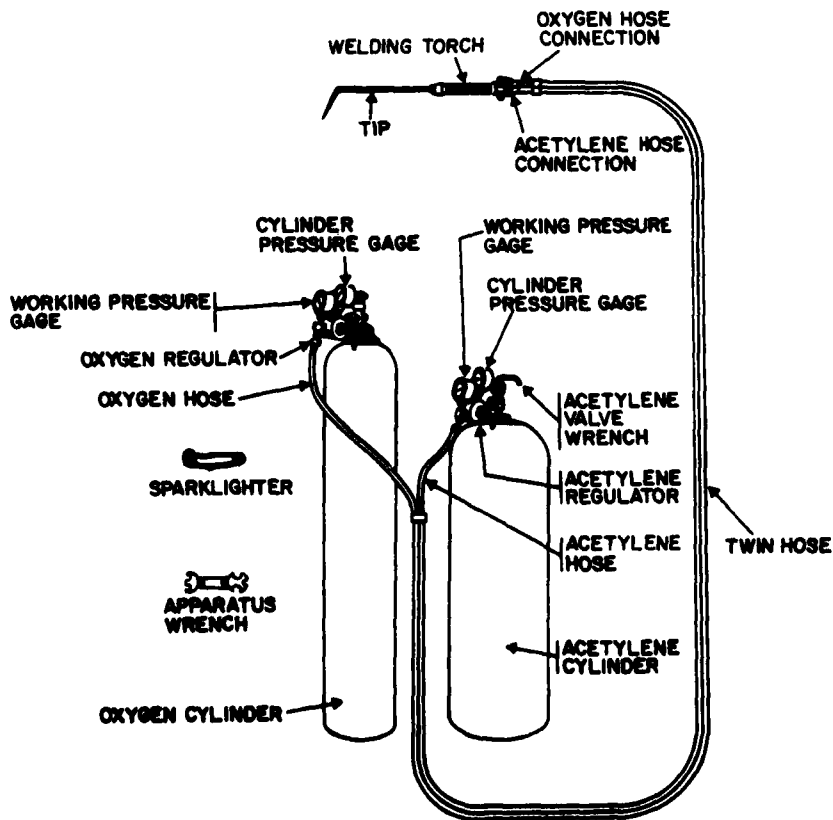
Portable oxy-acetylene welding and cutting equipment.
